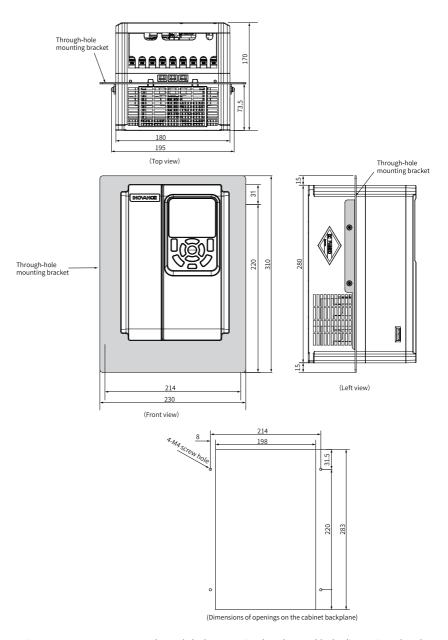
MD500-AZJ-A1T4 through-hole mounting bracket and hole dimensions (mm)
